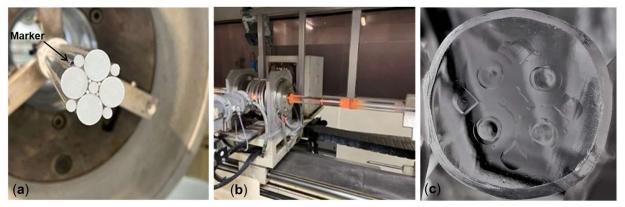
Assembly of core-rods, adjusting rods and marker to make the stacked primary prefrom (a); bench on which the stacked primary preform is collapsed (b); cross-section of the collapsed primary preform (c).
